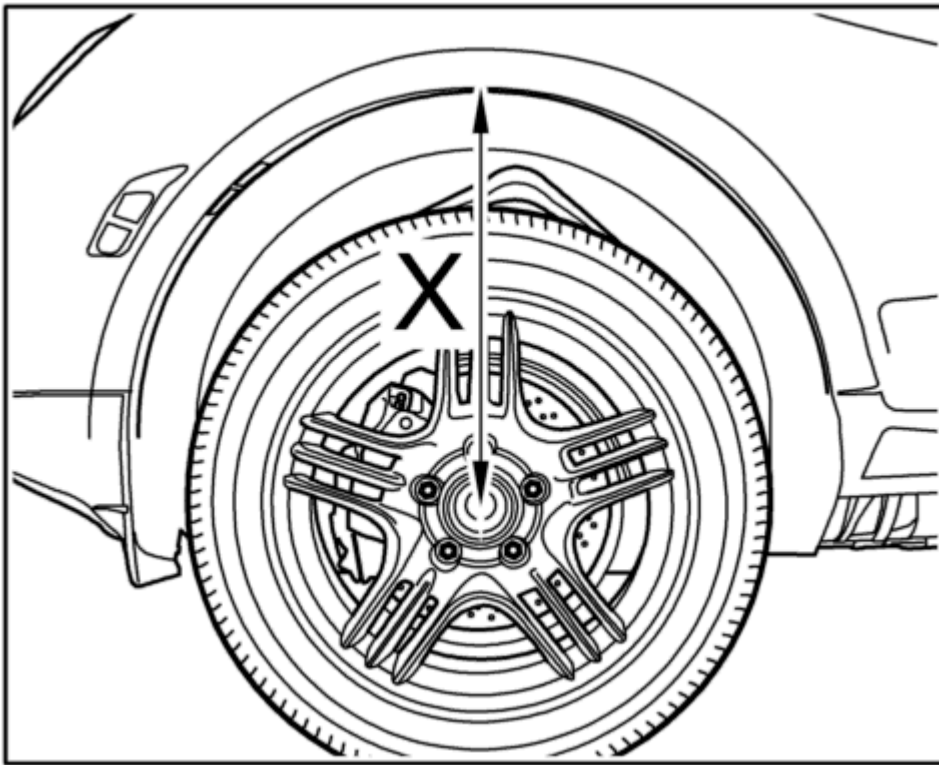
Entire threaded parts of axle must be tightened in vehicle position (Dimension -X-)
